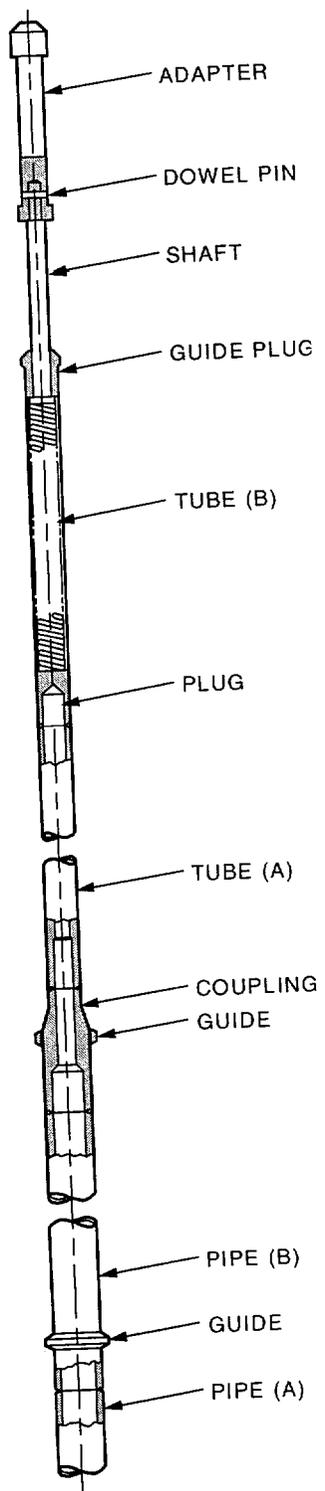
In-core Guide Tube, In-core Housing & In-core Penetration, BWR/6
